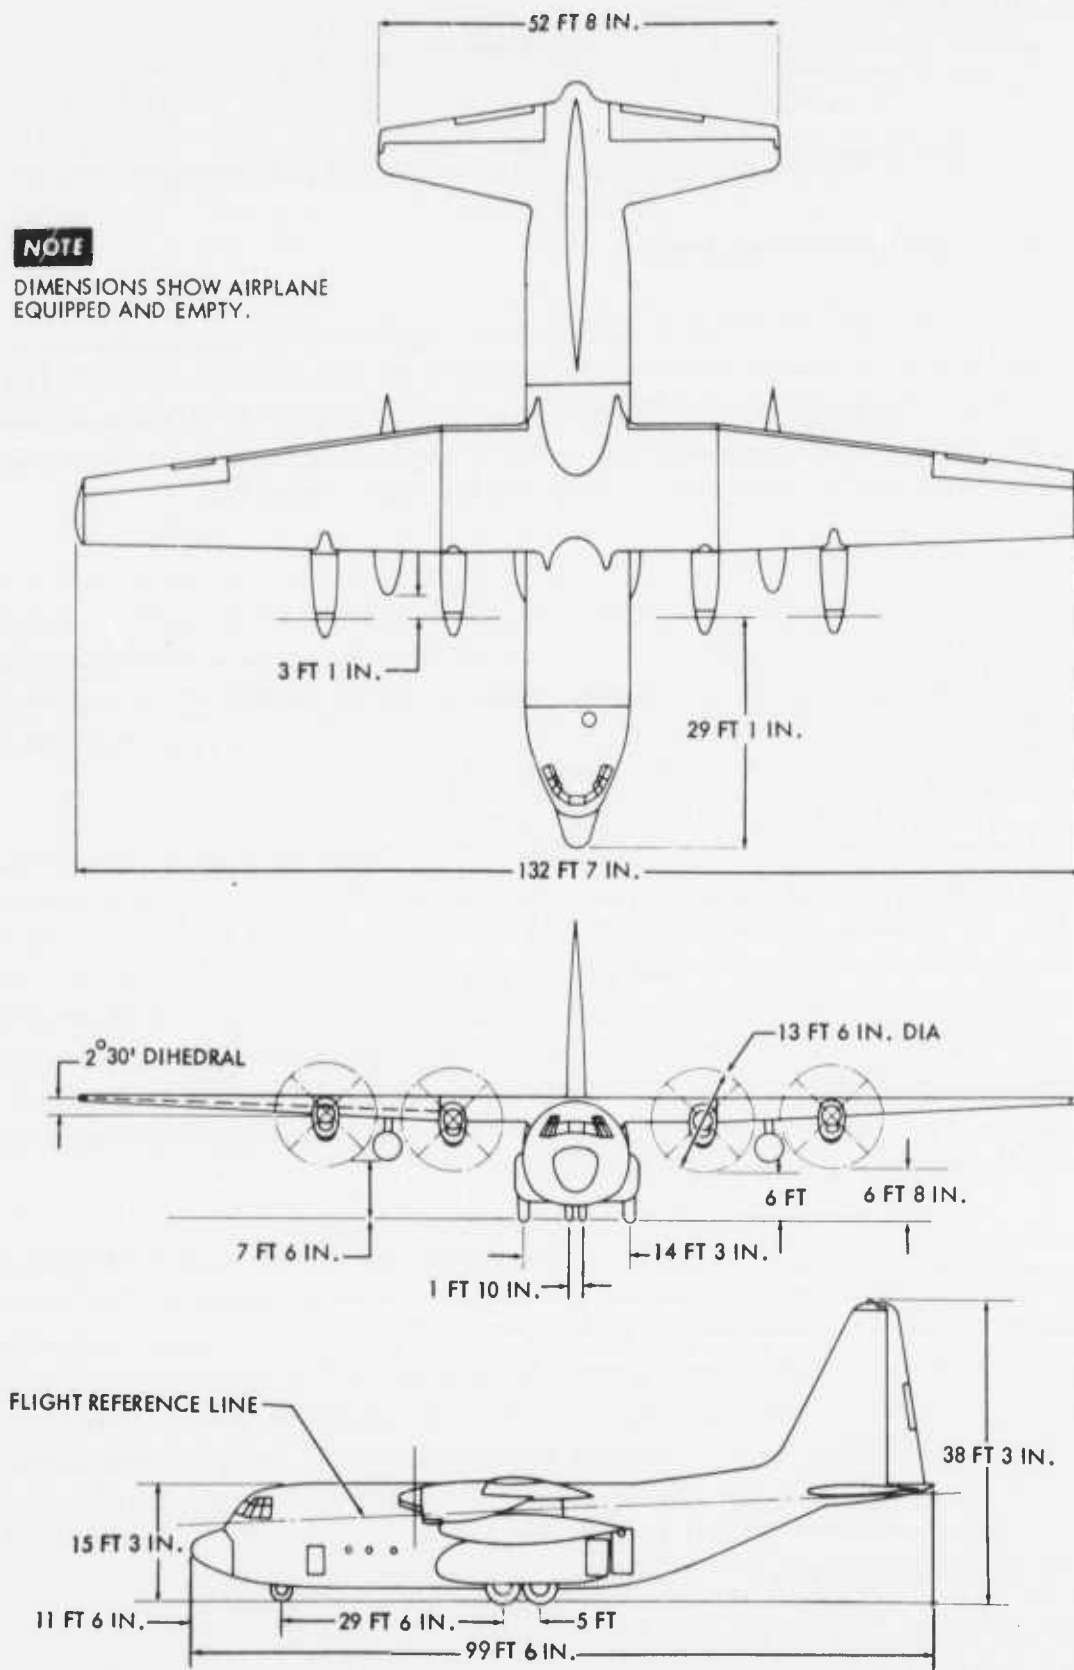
THREE VIEW DRAWING, C-130E AIRPLANE
